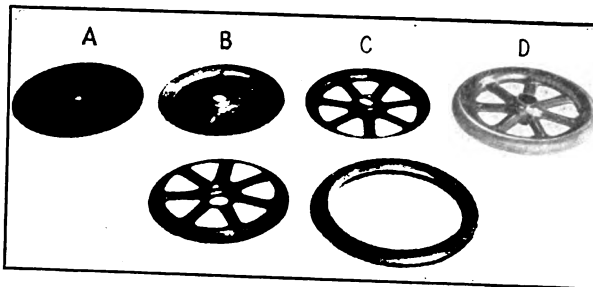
STEPS IN THE MAKING OF A STEEL WHEEL
